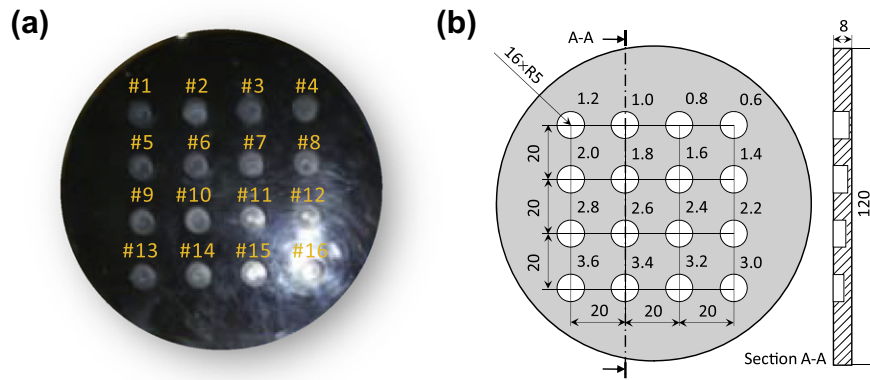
PMMA reference specimen with flat-bottomed holes of different depths: (a) rear side of the specimen and (b) drawing showing nominal dimensions (in mm) and relative position of defects.
